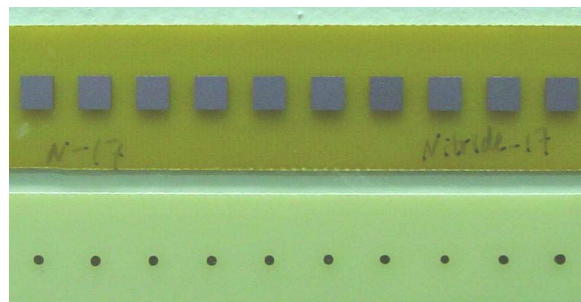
Assembled Shear Test Coupons Before and After Die Attaching
